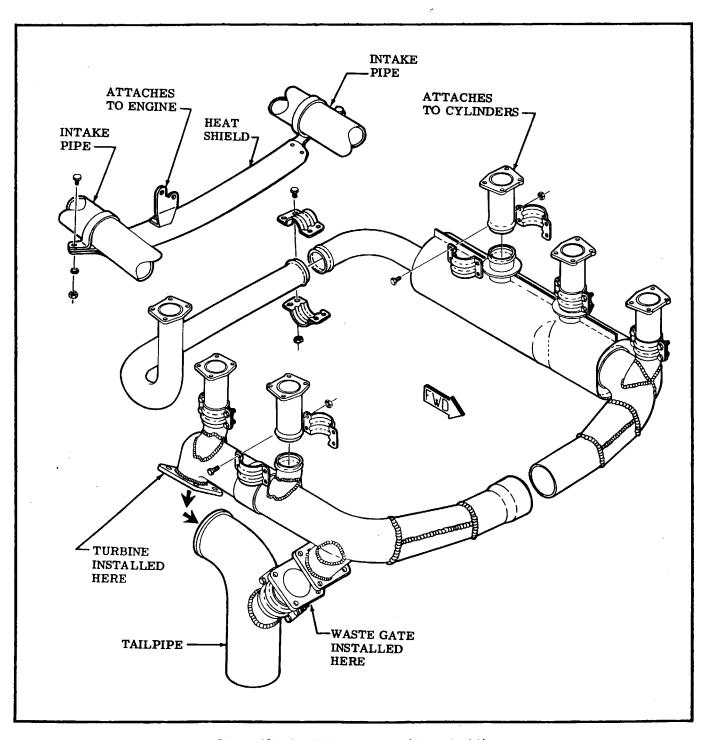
A-4. Exhaust System (Sheet 1 of 2)
